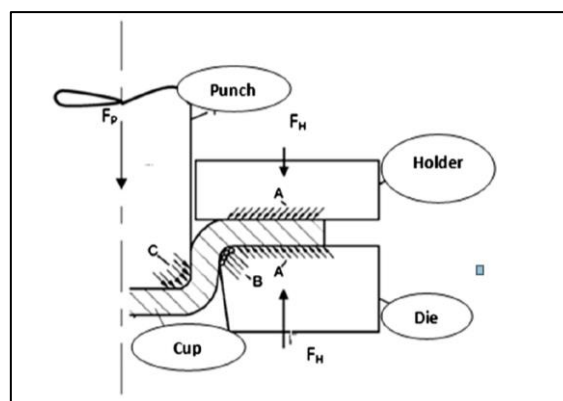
Friction area when deep drawn a cup (A) Friction area between sheet metal blank and holder and sheet metal blank die; (B) friction area between sheet metal blank and the die radius and (C) friction area between sheet metal blank and punch edges; F_p - total drawing force; F_H , blank holder force.
